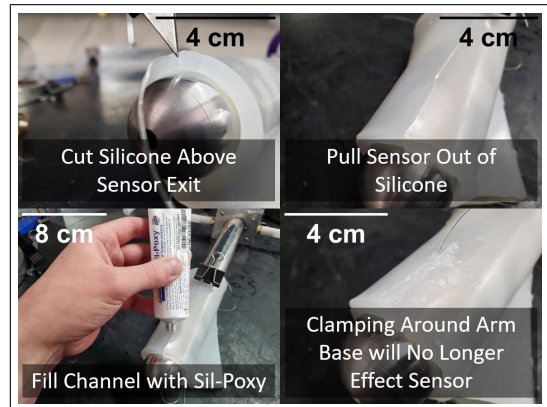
Lead Removal Process (6 mm Thick Skin for Clarity)
